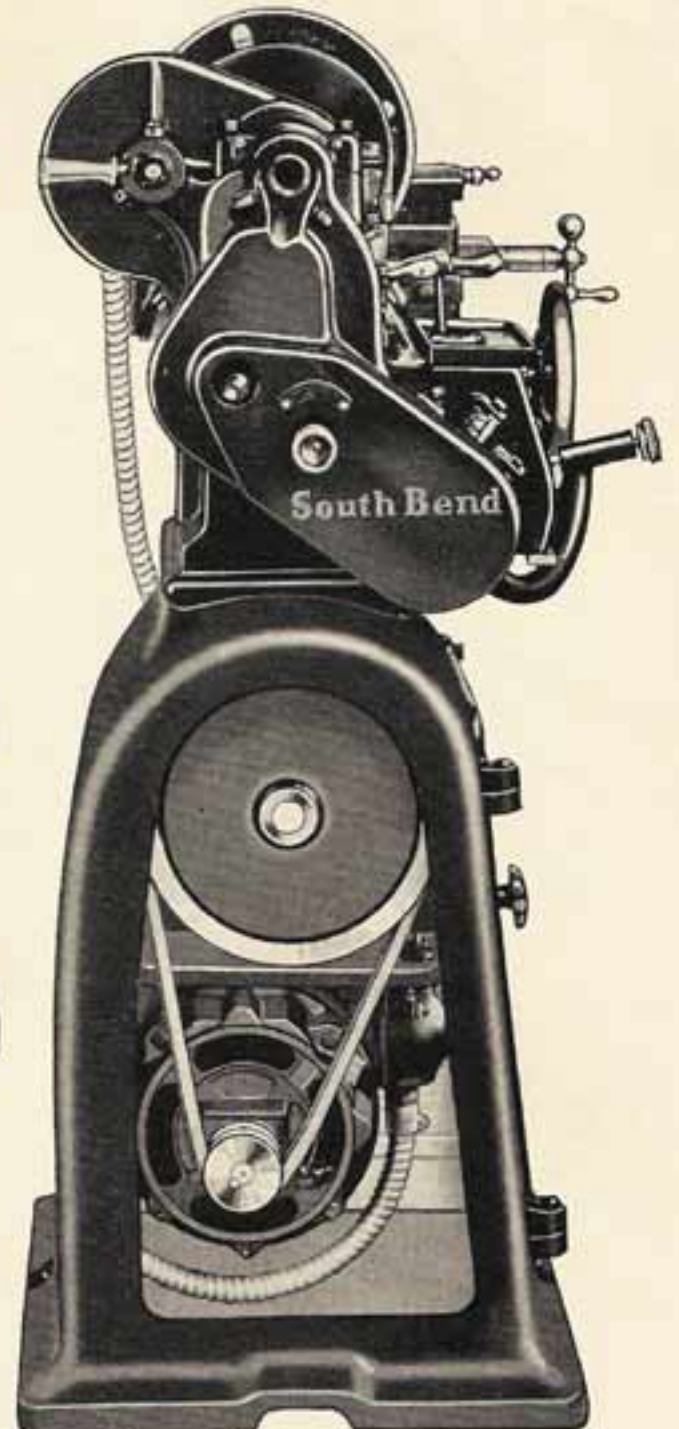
End view of lathe with end plate removed to show multiple "V" belt drive from motor.
